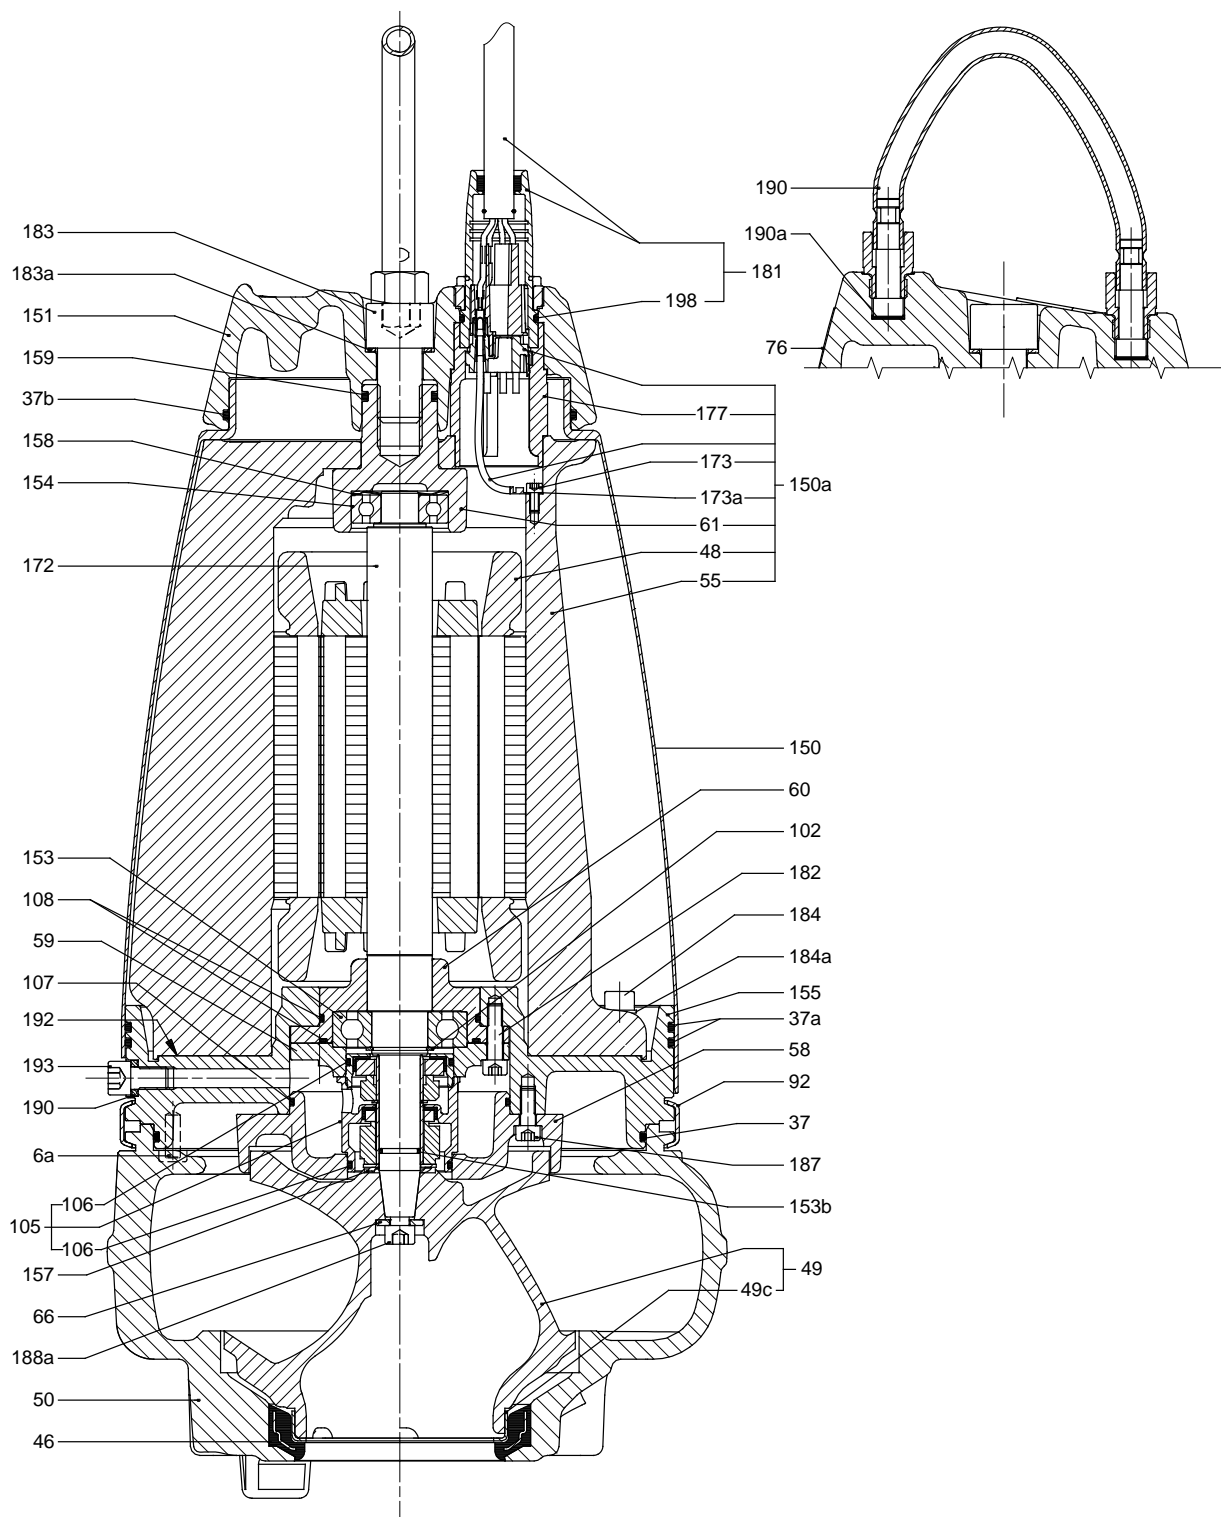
Sectional drawing, SE1 pump with S-tube® impeller
